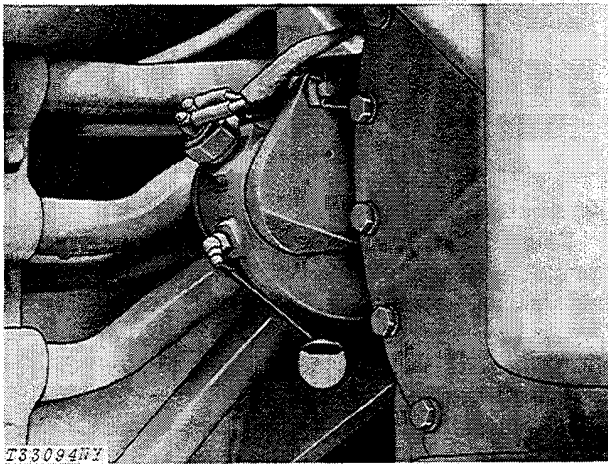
Shift Control Bell Crank Fitting (1 Point)
